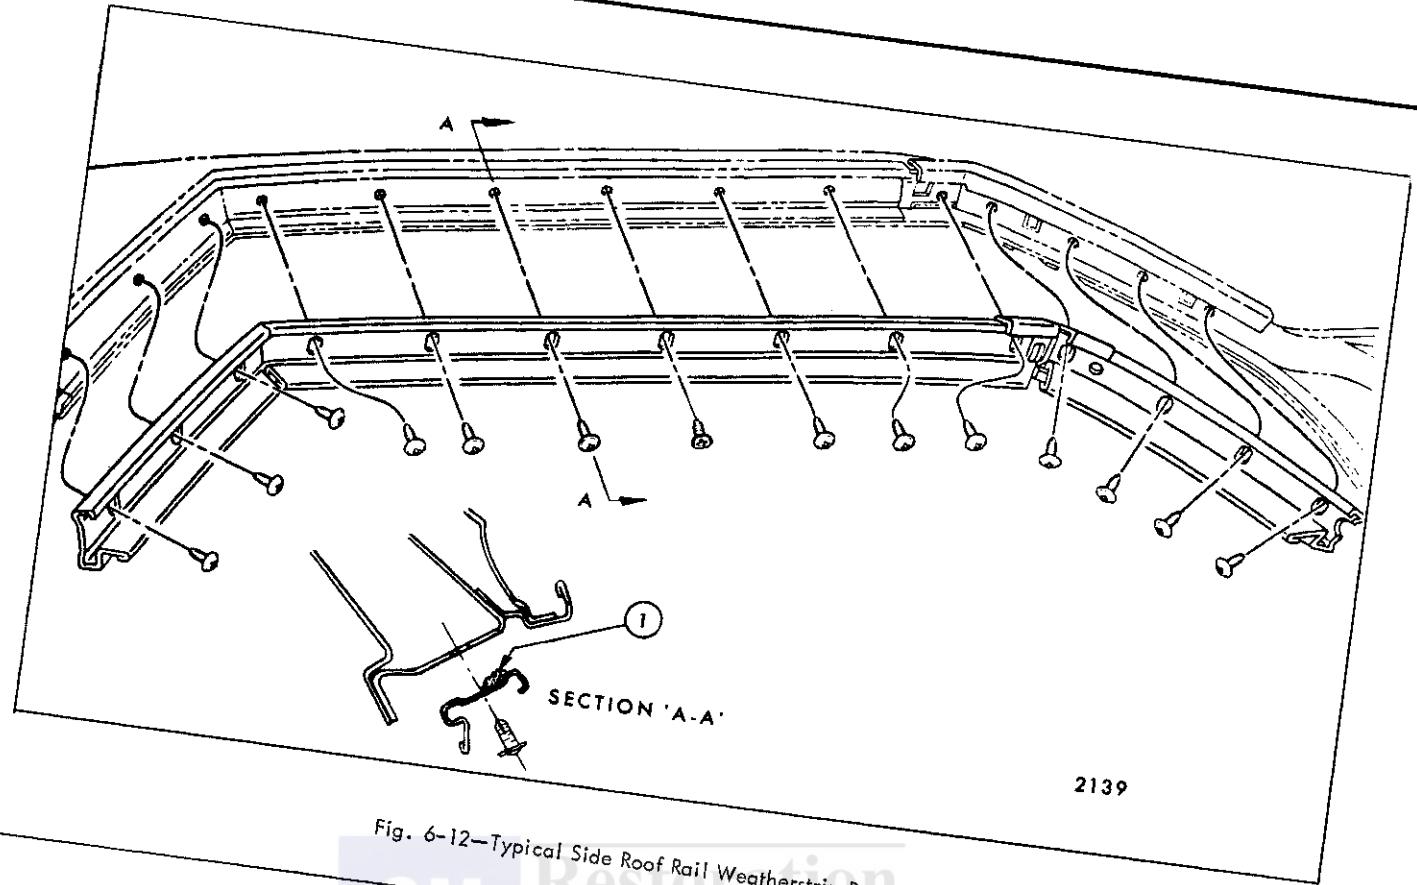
Typical Side Roof Rail Weatherstrip Retainer
